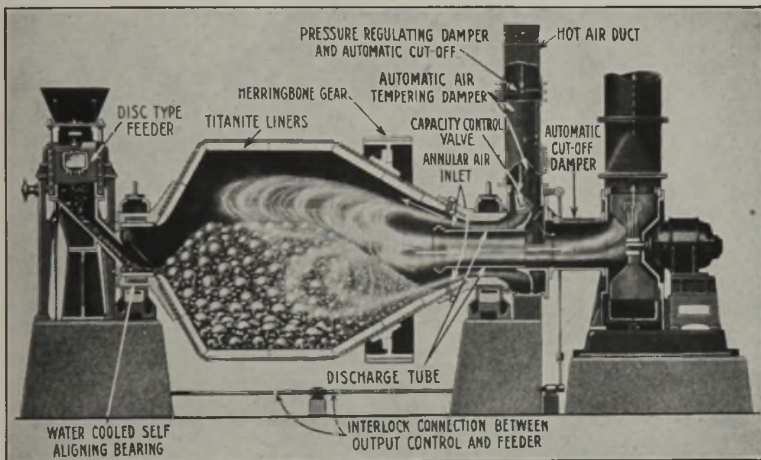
Longitudinal section through typical Hardinge ball mill.
